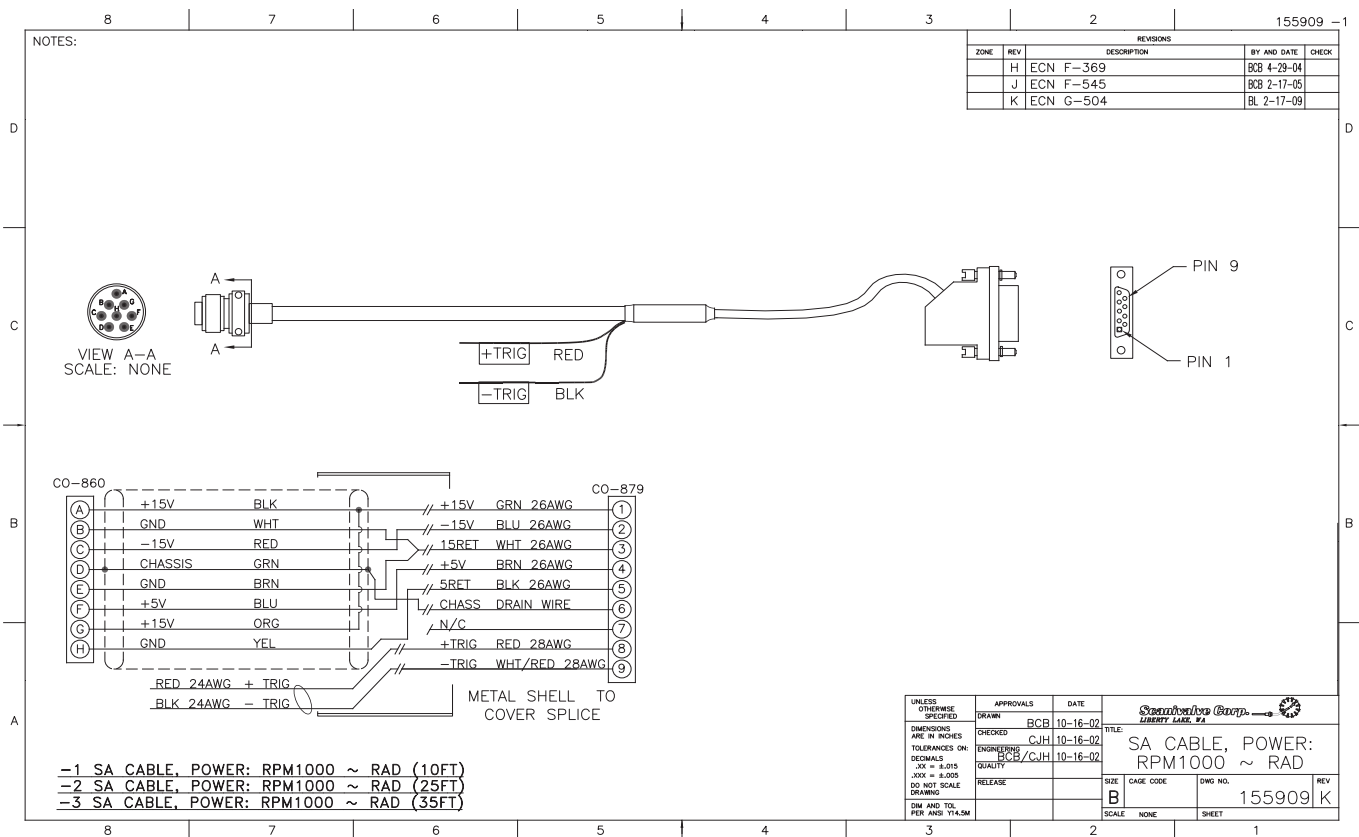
ERAD4000 TO RPM1000 POWER CABLE WIRING
